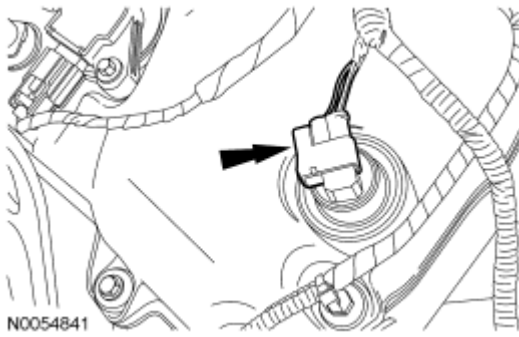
Locating RH Variable Camshaft Timing (VCT) Solenoid Electrical Connector
